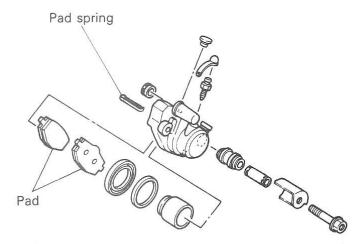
YTZ 250 brake caliper components — exploded view (Sec 11)
